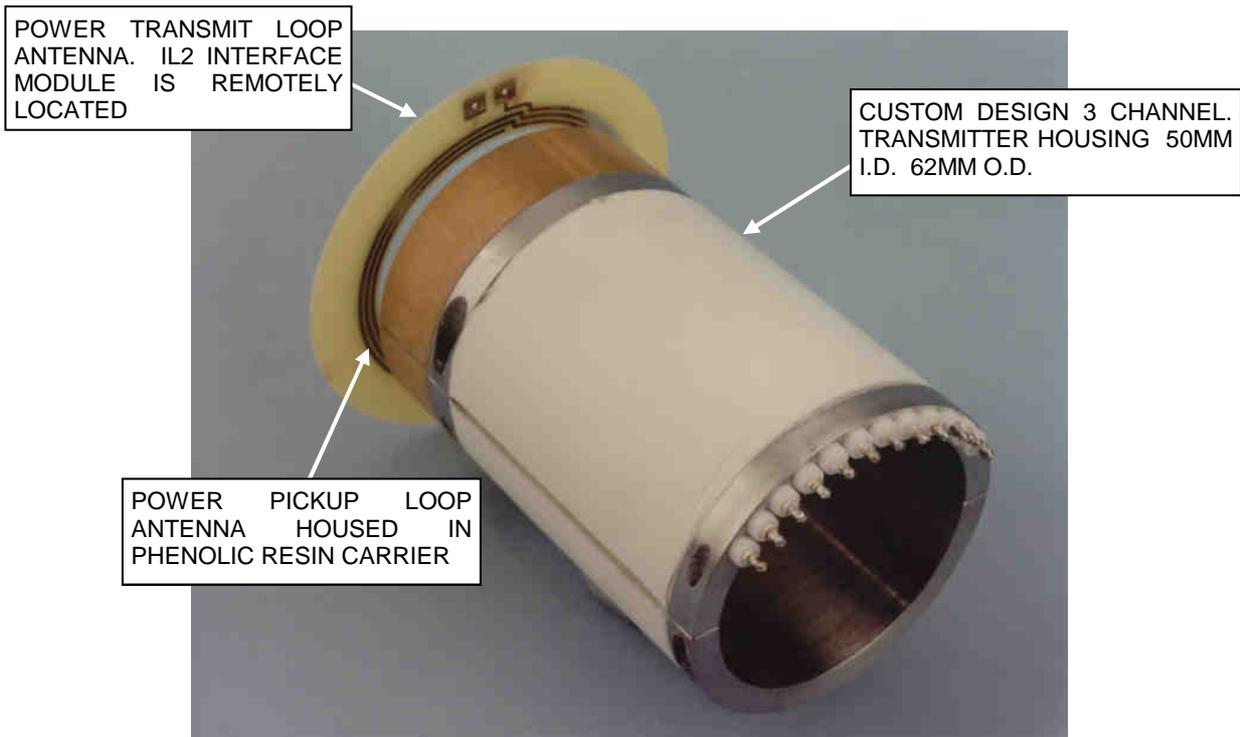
Example of Custom Transmitter for Gearbox Installation. IL2 Module Remotely Located & Power Pickup Loop Integrated into Transmitter Housing
